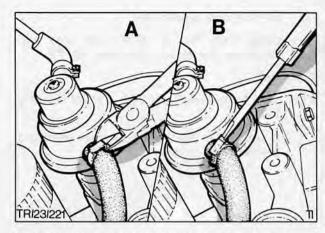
Disconnecting and reconnecting fuel pump outlet
